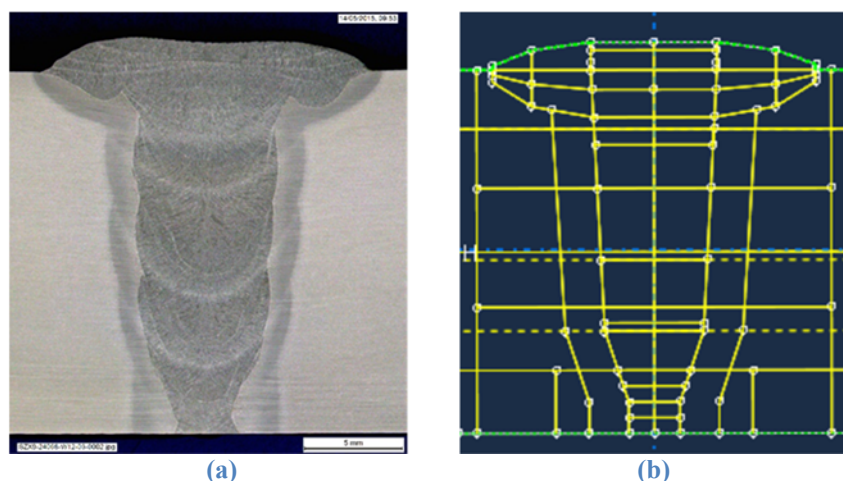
Geometry of the weld cross section in (a) an experimental extracted weld macrograph and (b) a modelled weld profile
